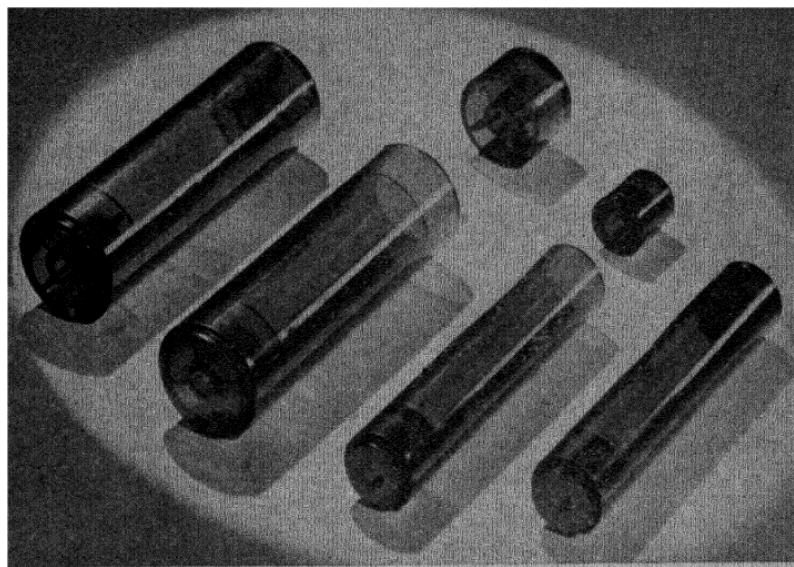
Machine-gun ammunition rollers of cellulose acetate-butyrate. Each roller consists of molded tube with pressed-in molded bearings which fit against molded-in shoulders in the tubes.
